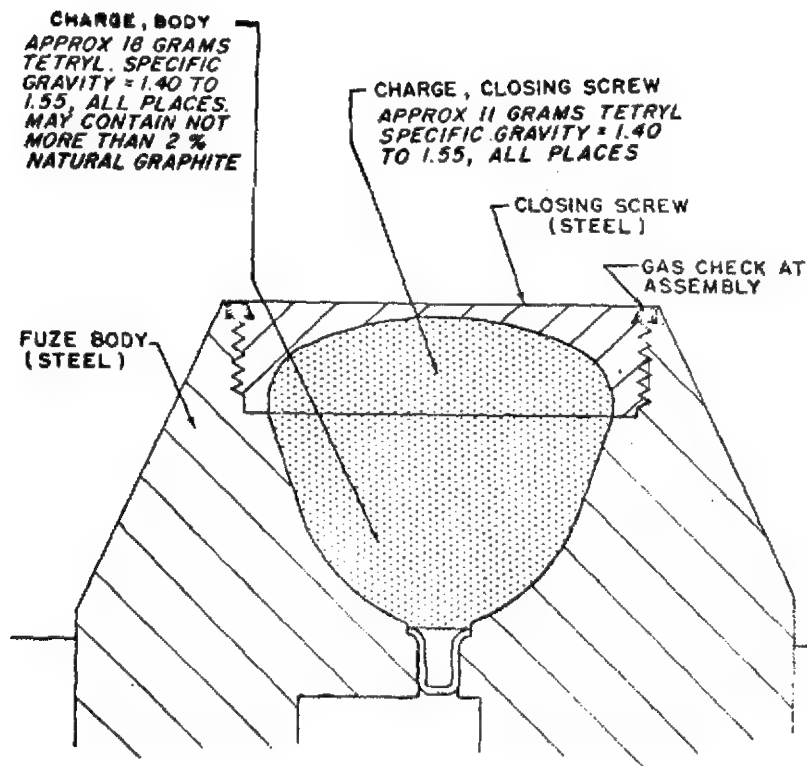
BOOSTER ASSEMBLY FOR BD FUZE, M60
